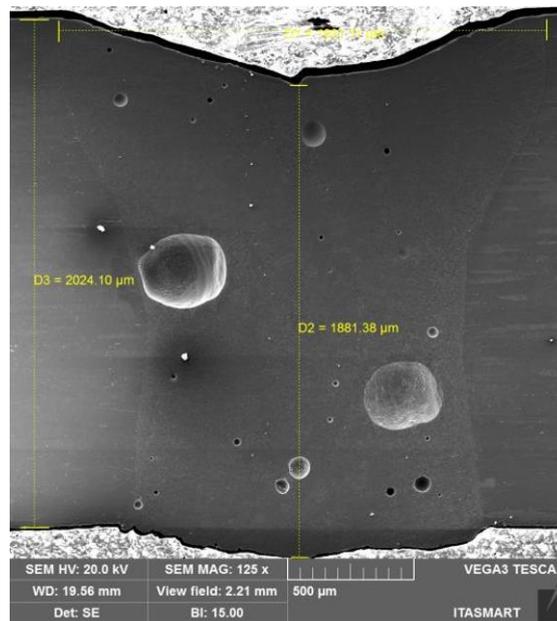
Cross-section dimensions of weld for P = 1.5 kW and single pass
